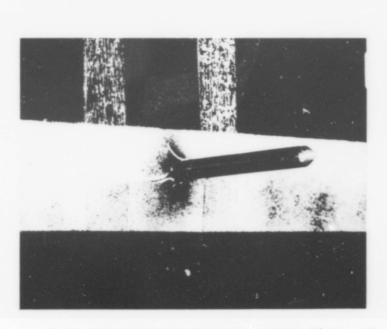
Typical Crack Arrest Behavior of 7075-T6 Bare Panels With Two 0.75-Inch by 0.010-Inch 1002-S Fiberglass Straps on Front and Back Sides of Specimen; Strap Spacing, Centerline to Centerline = 2.75 Inches.
